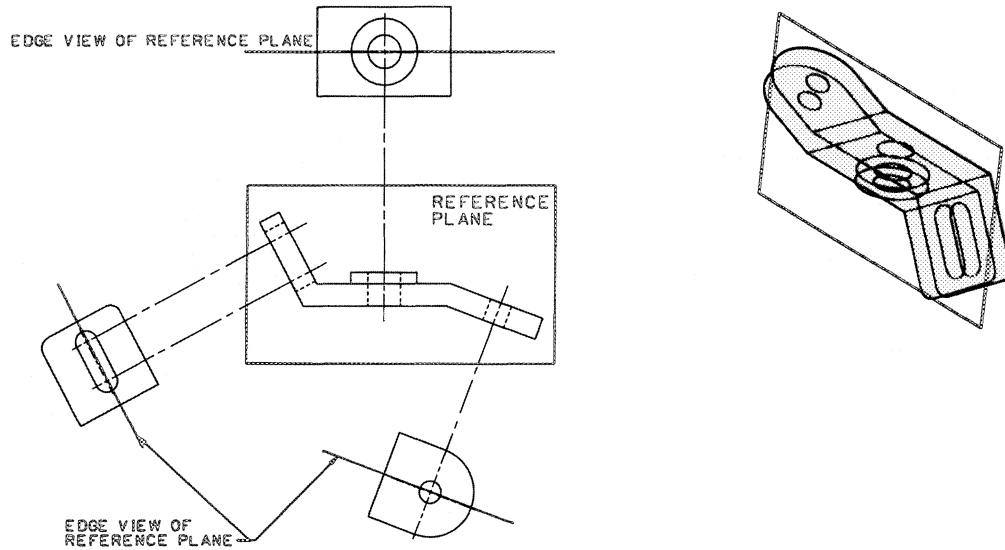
Reference Plane Method of Auxiliary View Projection
